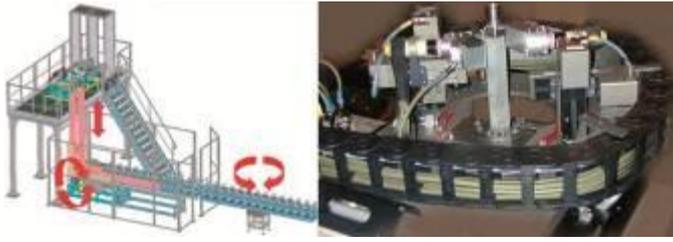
Welding of bottom and top nozzle onto fuel casings
